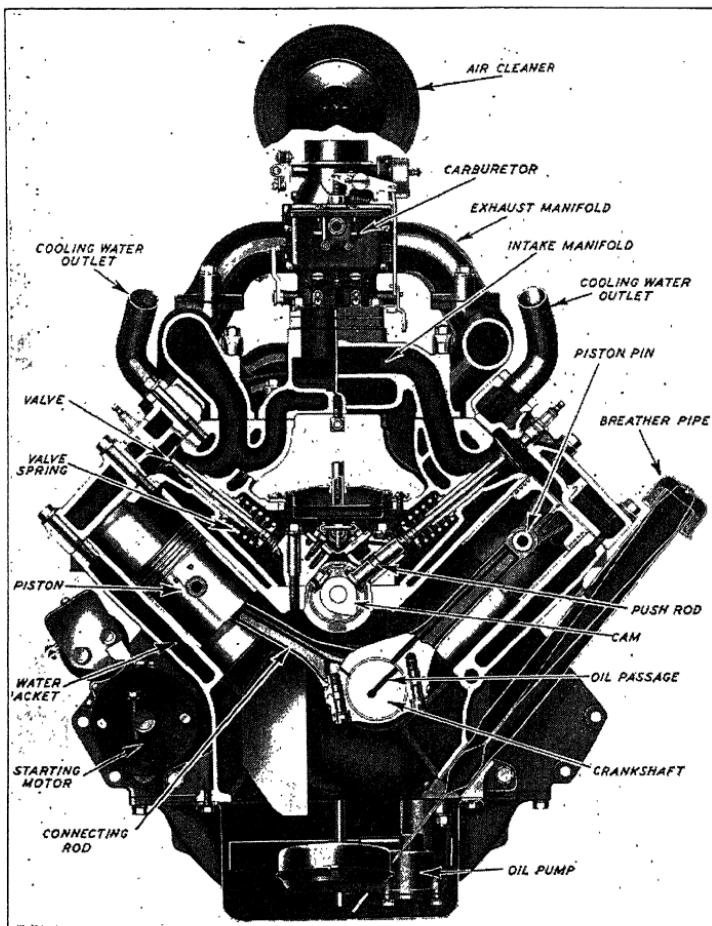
Cadillac 90° V-8, Series 36-60, 70 and 75 Engine
